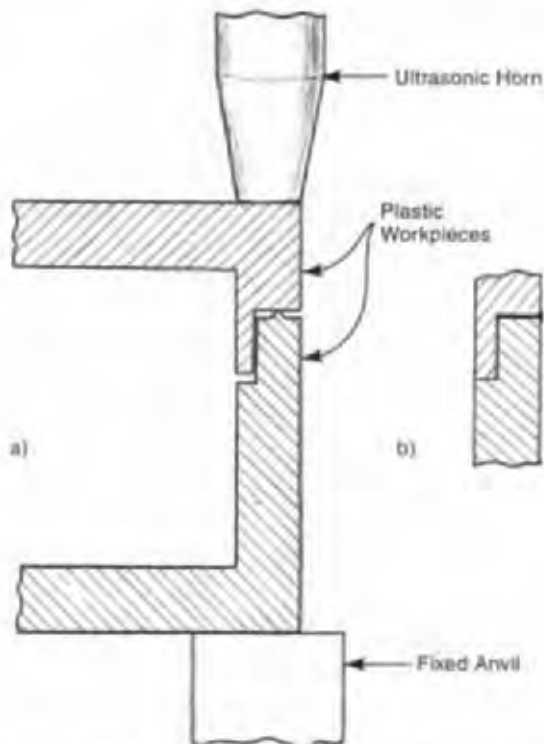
L4 Ultrasonic welding of two plastic parts: a) The joint before welding. b) The joint after welding.
